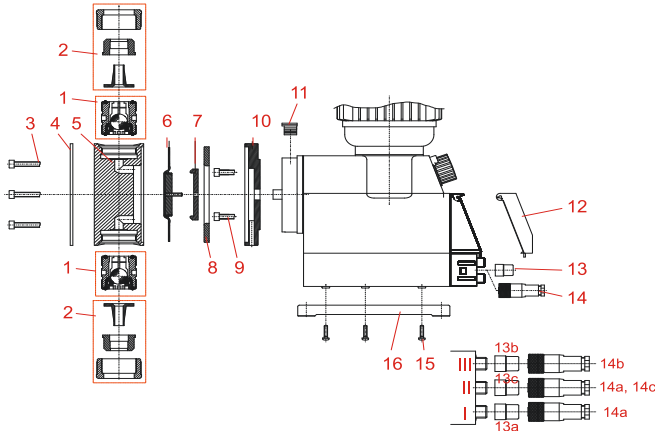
Exploded drawing / list of parts, type 00800 and 01200
